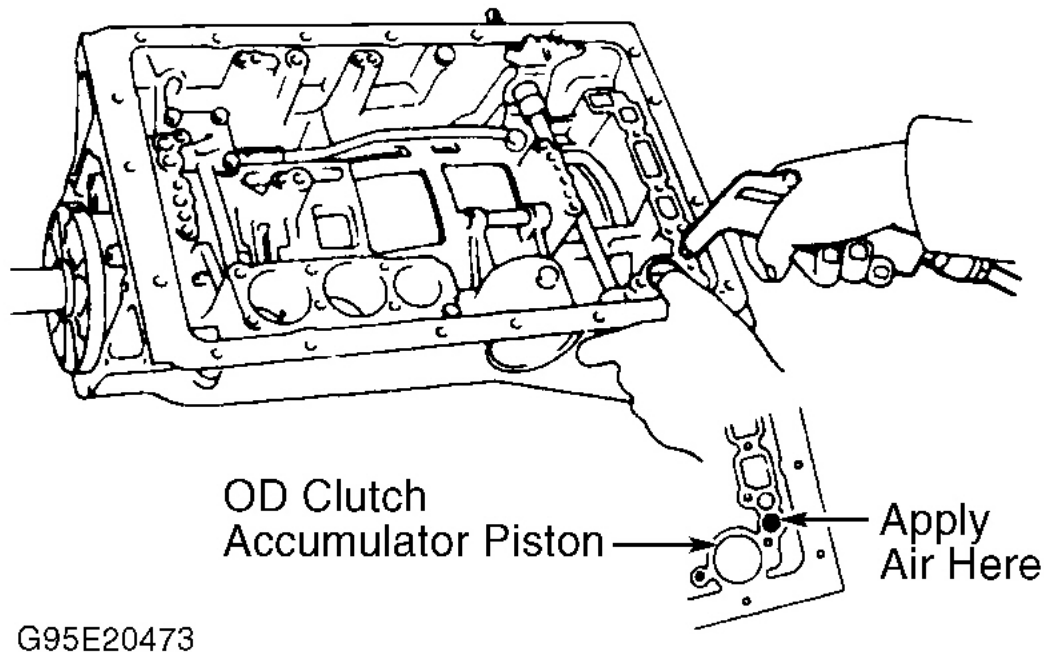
Removing OD Clutch (C0) Accumulator Piston & Springs
